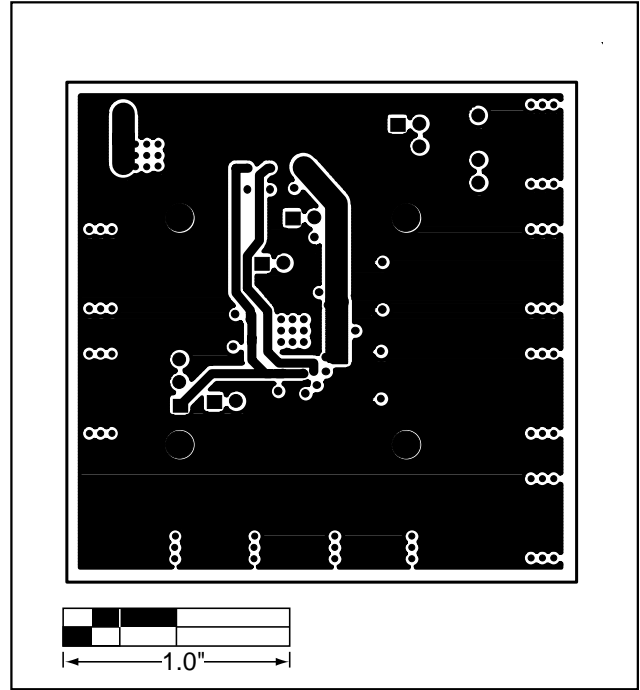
MAX3875 EV Kit PC Board Layout—Power Plane
